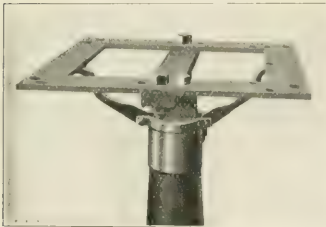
AIR PUMP HOLDING RACK WITH PLATE IN HORIZONTAL POSITION.
